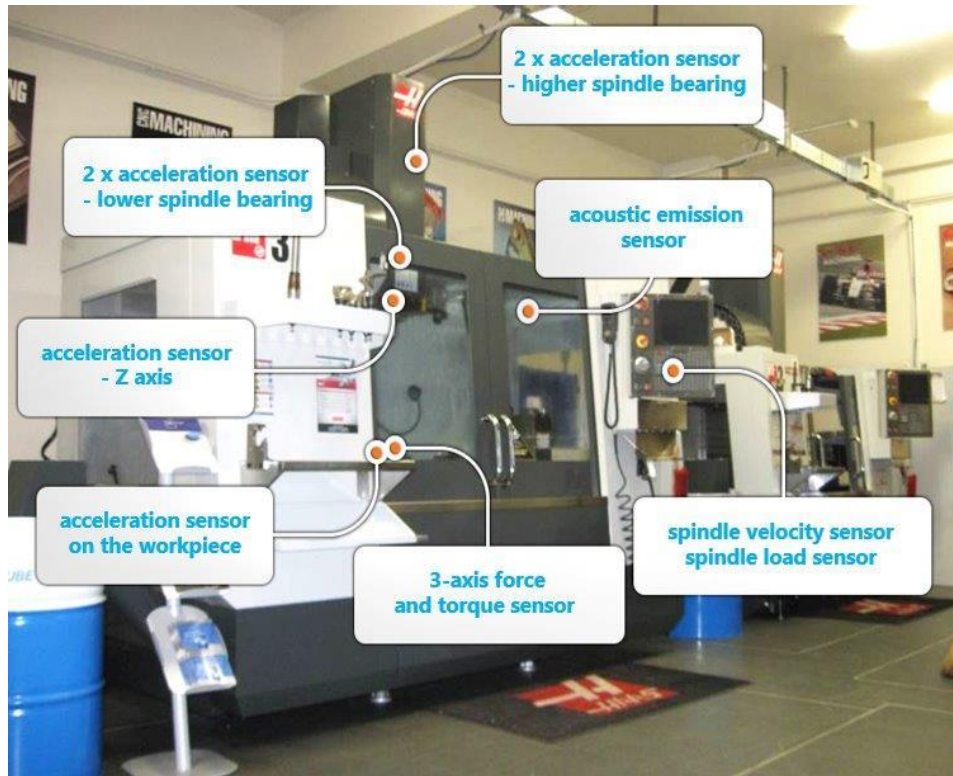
Industrial CNC milling machine with a set of tool condition monitoring sensors [171]
